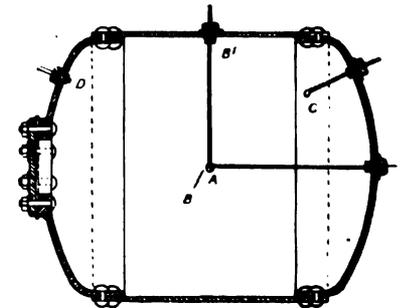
Sectional drawing of Explosion Cylinder (Hopkinson's experiments).
